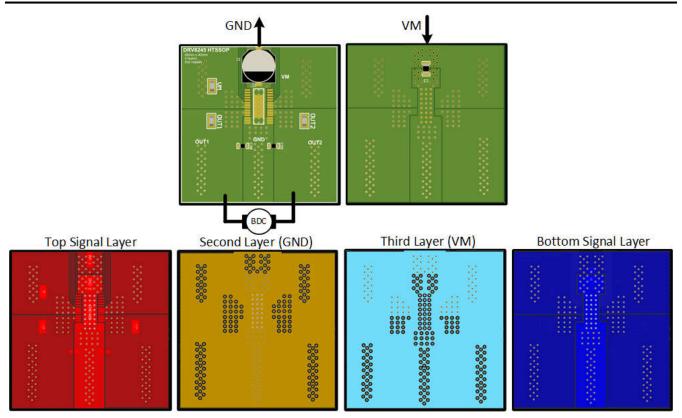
Layout example: 4cm x 4 cm x 1.6mm, 4 layer PCB
